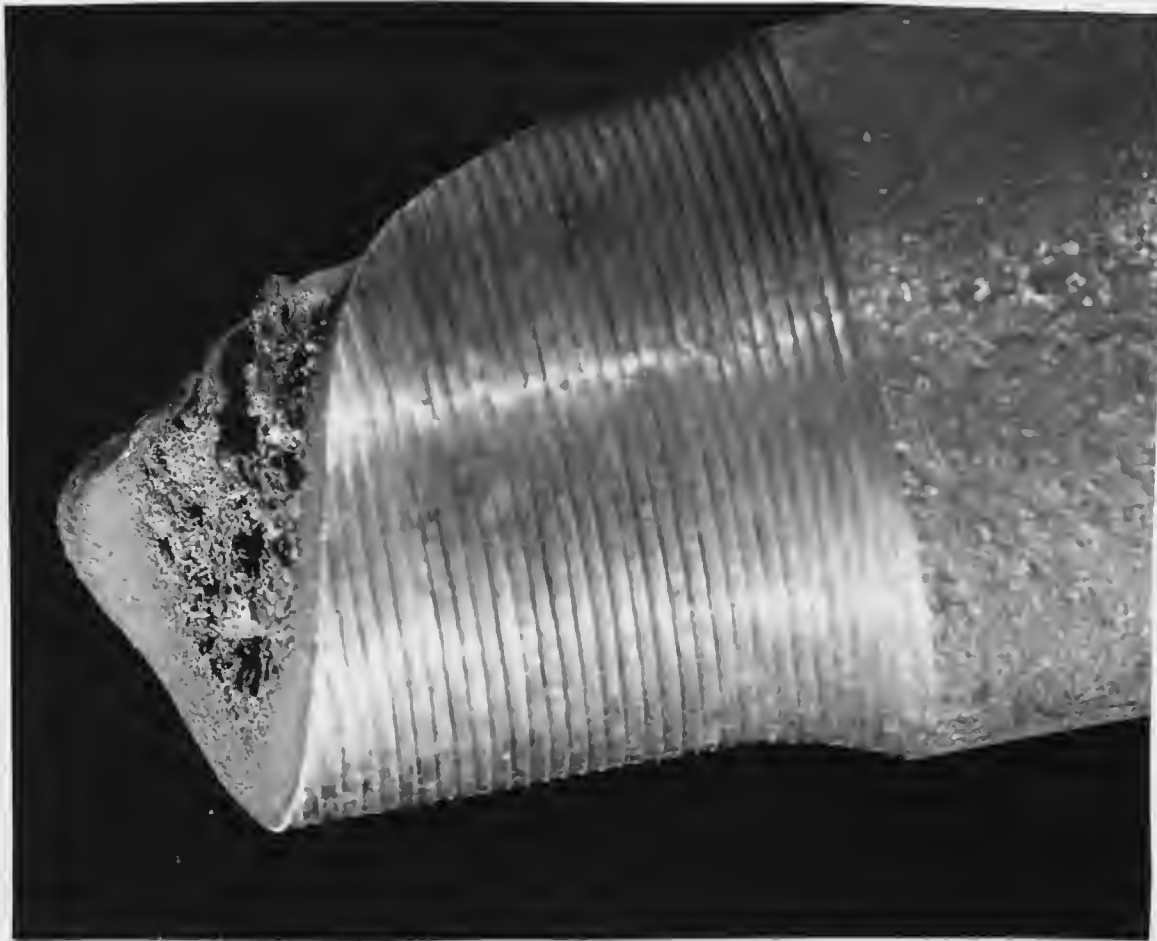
Fracture surface of axle as viewed perpendicular to the axis of the axle. Rotated  $90^{\circ}$  from the position in Photo A-3. Approx. 3X
